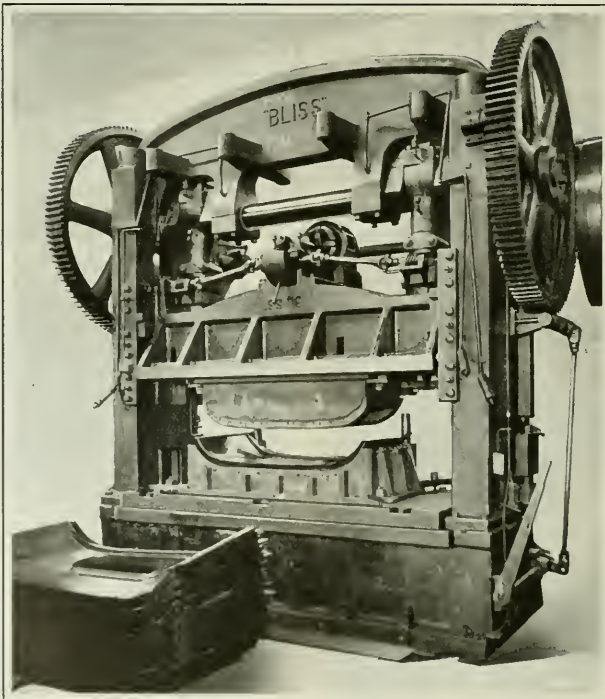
Trimming and flanging the Edges of a Sedan Body Part and blanking and flanging the Window
